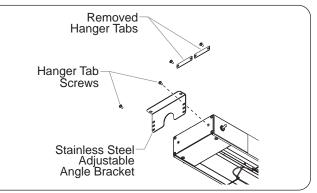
Stainless Steel Model Adjustable Angle Bracket Installation
